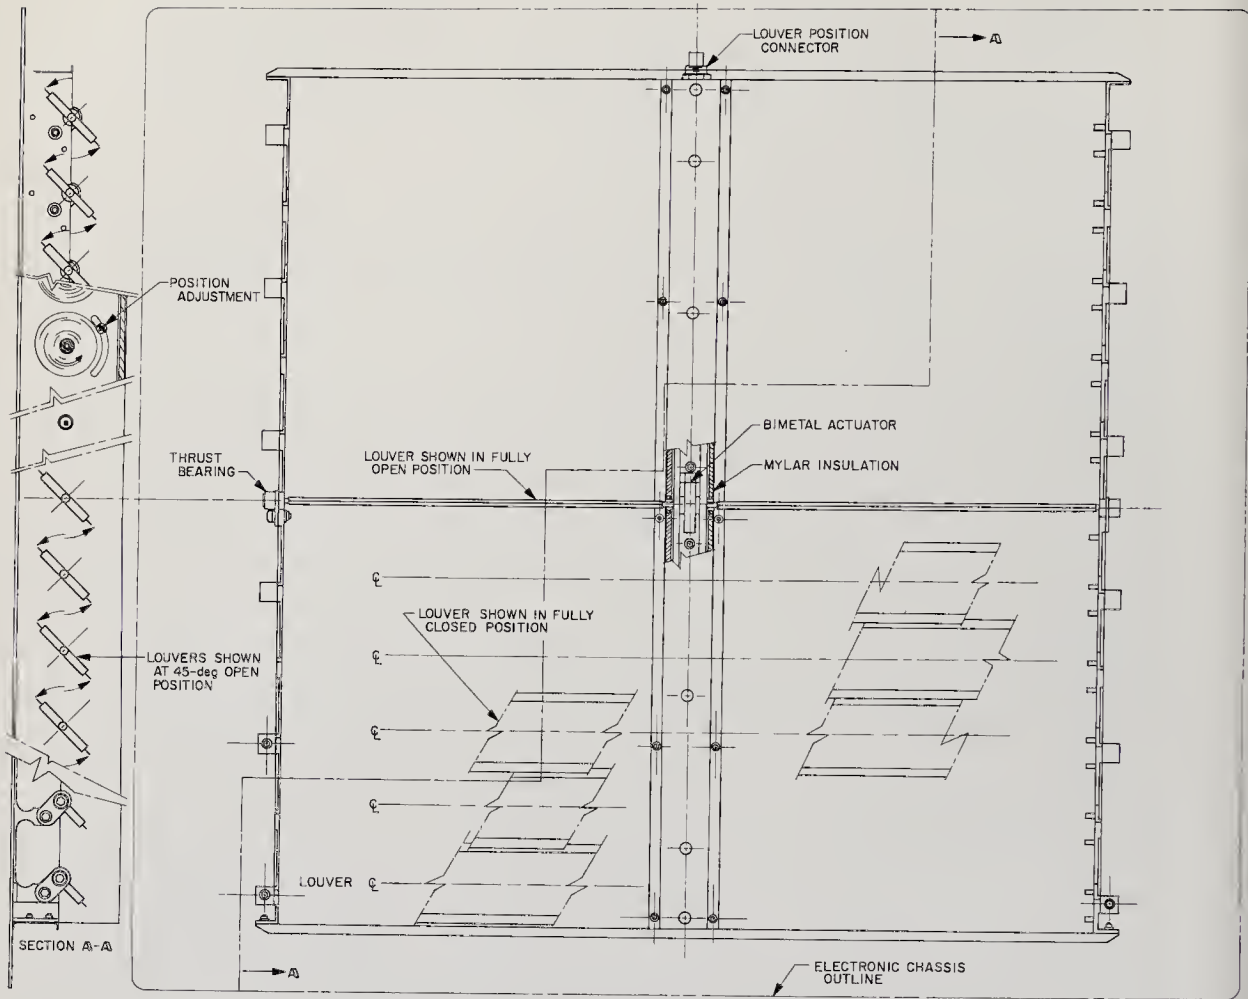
Louver mechanism on Mariner 2 used to control the spacecraft temperature. (JPL drawing)
